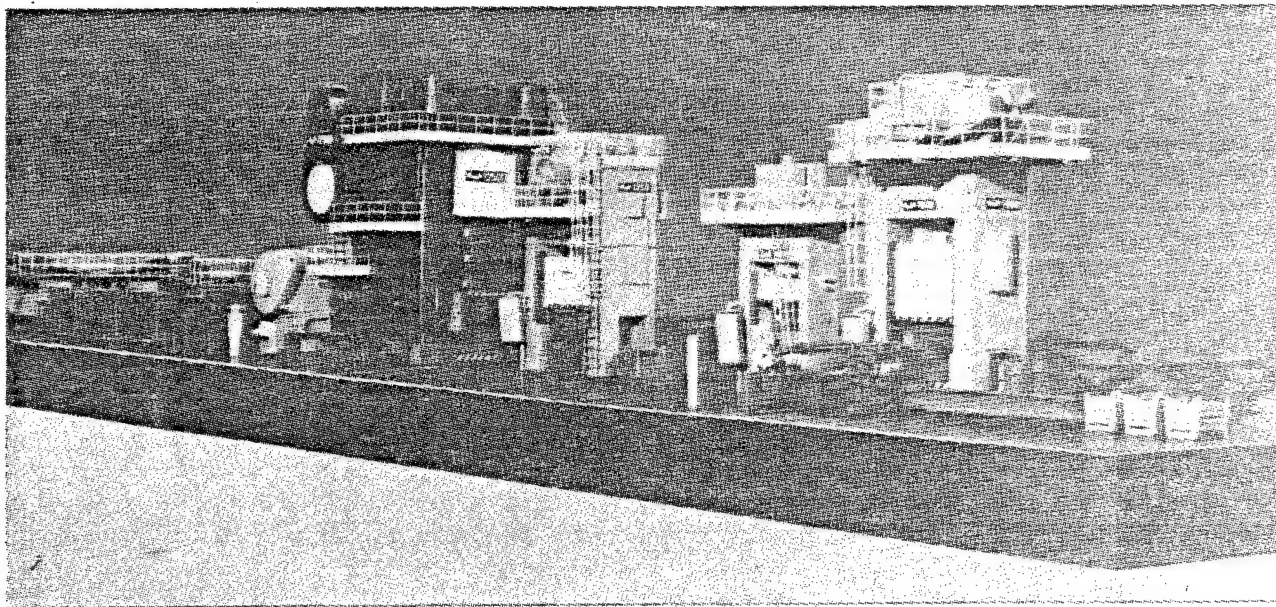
Automatic line for stamping crankshafts and front axle automobile beams of trucks (prototype)
